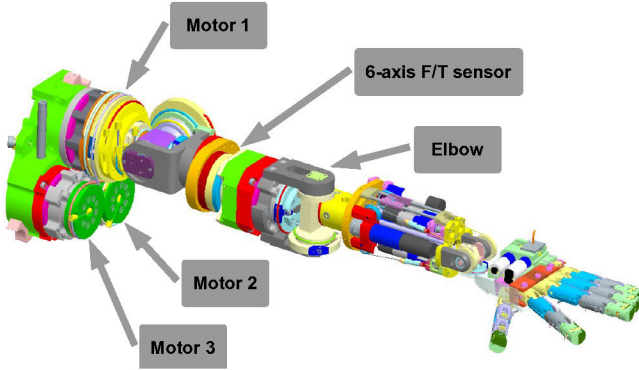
The iCub arm. A CAD view of the shoulder joint mechanism showing the three motors actuating the joint and the pulley system, the F/T sensor, the elbow and the hand.
